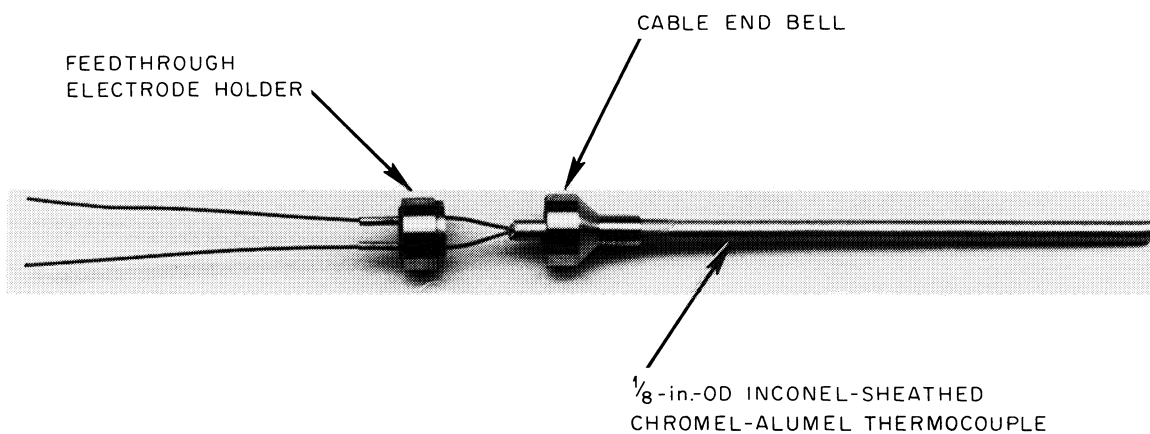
End Seal for  $\frac{1}{8}$ -in.-OD Sheathed Thermocouple.
